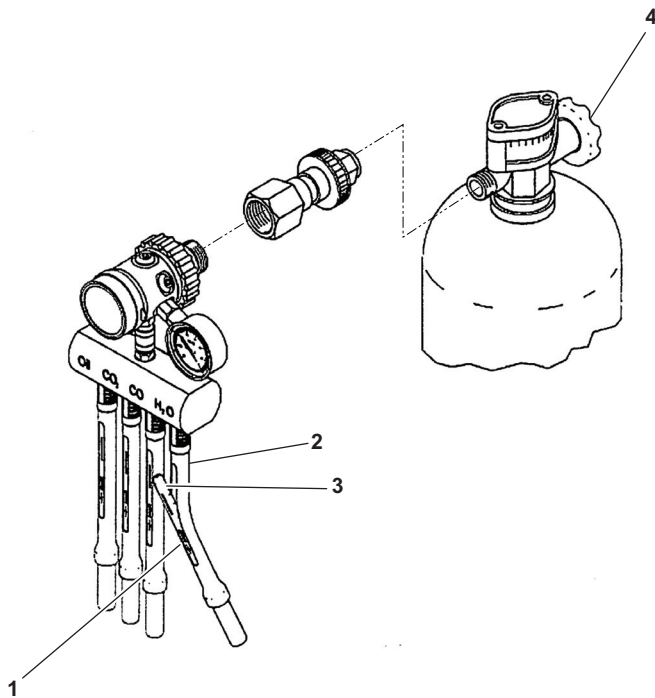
Water Vapor Drager Test Tube and Tube Holder
